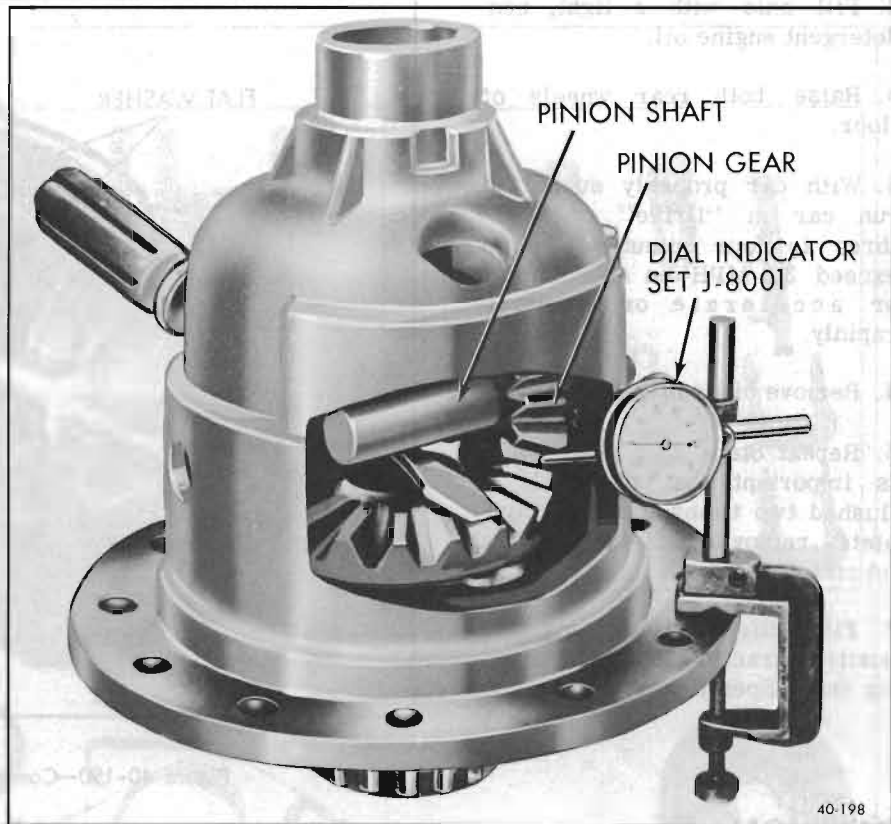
Checking Side Gear to Pinion Gear Backlash
